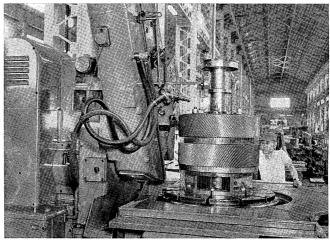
Reduction gear in processing (for a food plant) 1500 kw backpressure turbine 29 kg/cm²g 390°C backpressure 3 kg/cm²g 7200/1800 rpm
